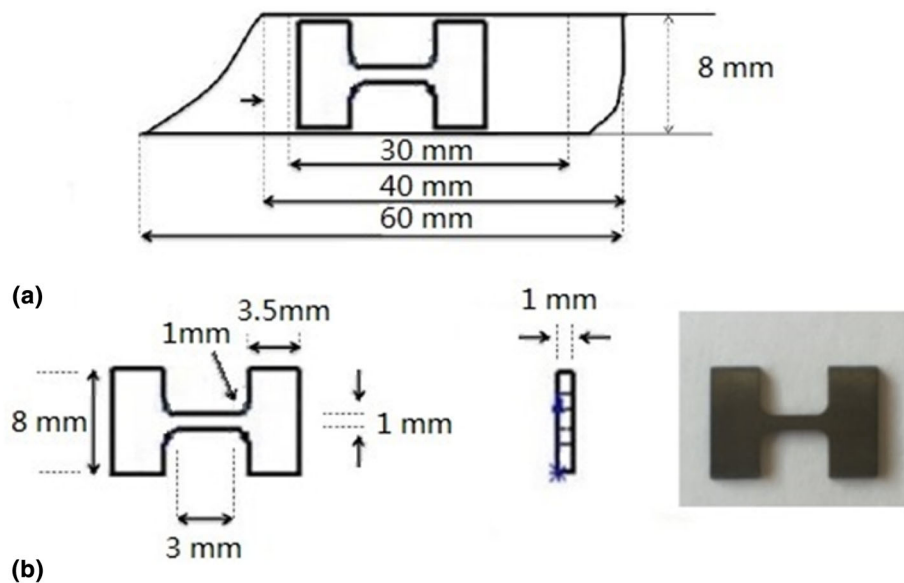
(a) Extraction of the micro-tensile samples from the ECAP samples. (b) Dimensions of the micro-tensile samples used in this work
